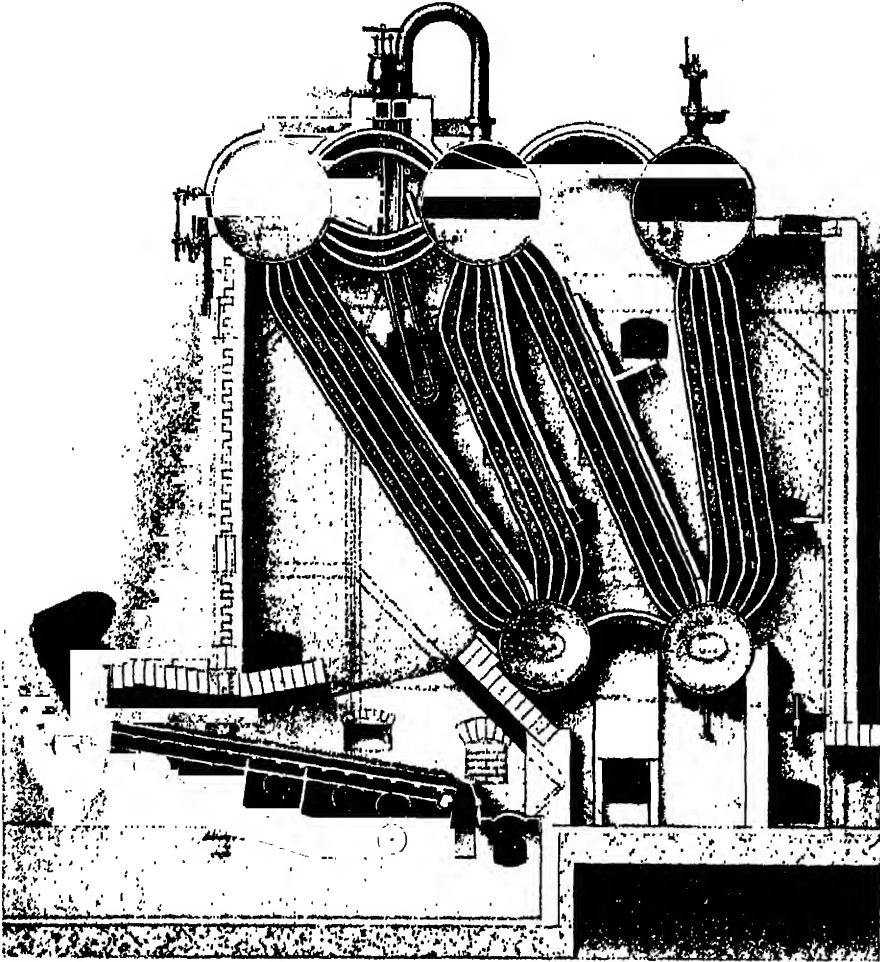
Stirling 5-drum Boiler, Superheater, and Stoker
